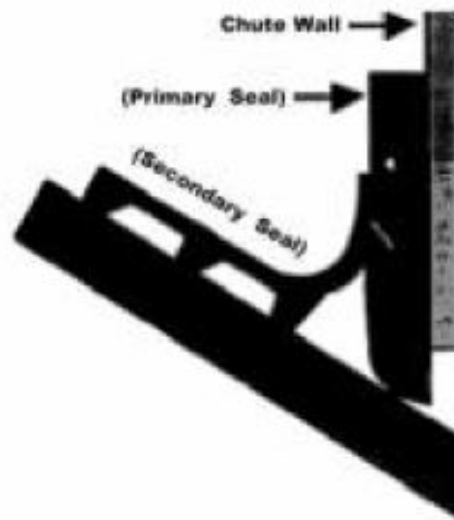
Cross section of skirt and skirt seal configuration [53]
